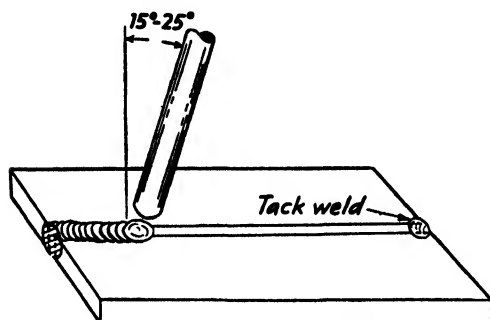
Butt welding thin steel. Beveling of the edges is not required on parts less than about $\frac{1}{8}$ in. thick. Space the edges apart a distance equal to about half the thickness of the metal.
